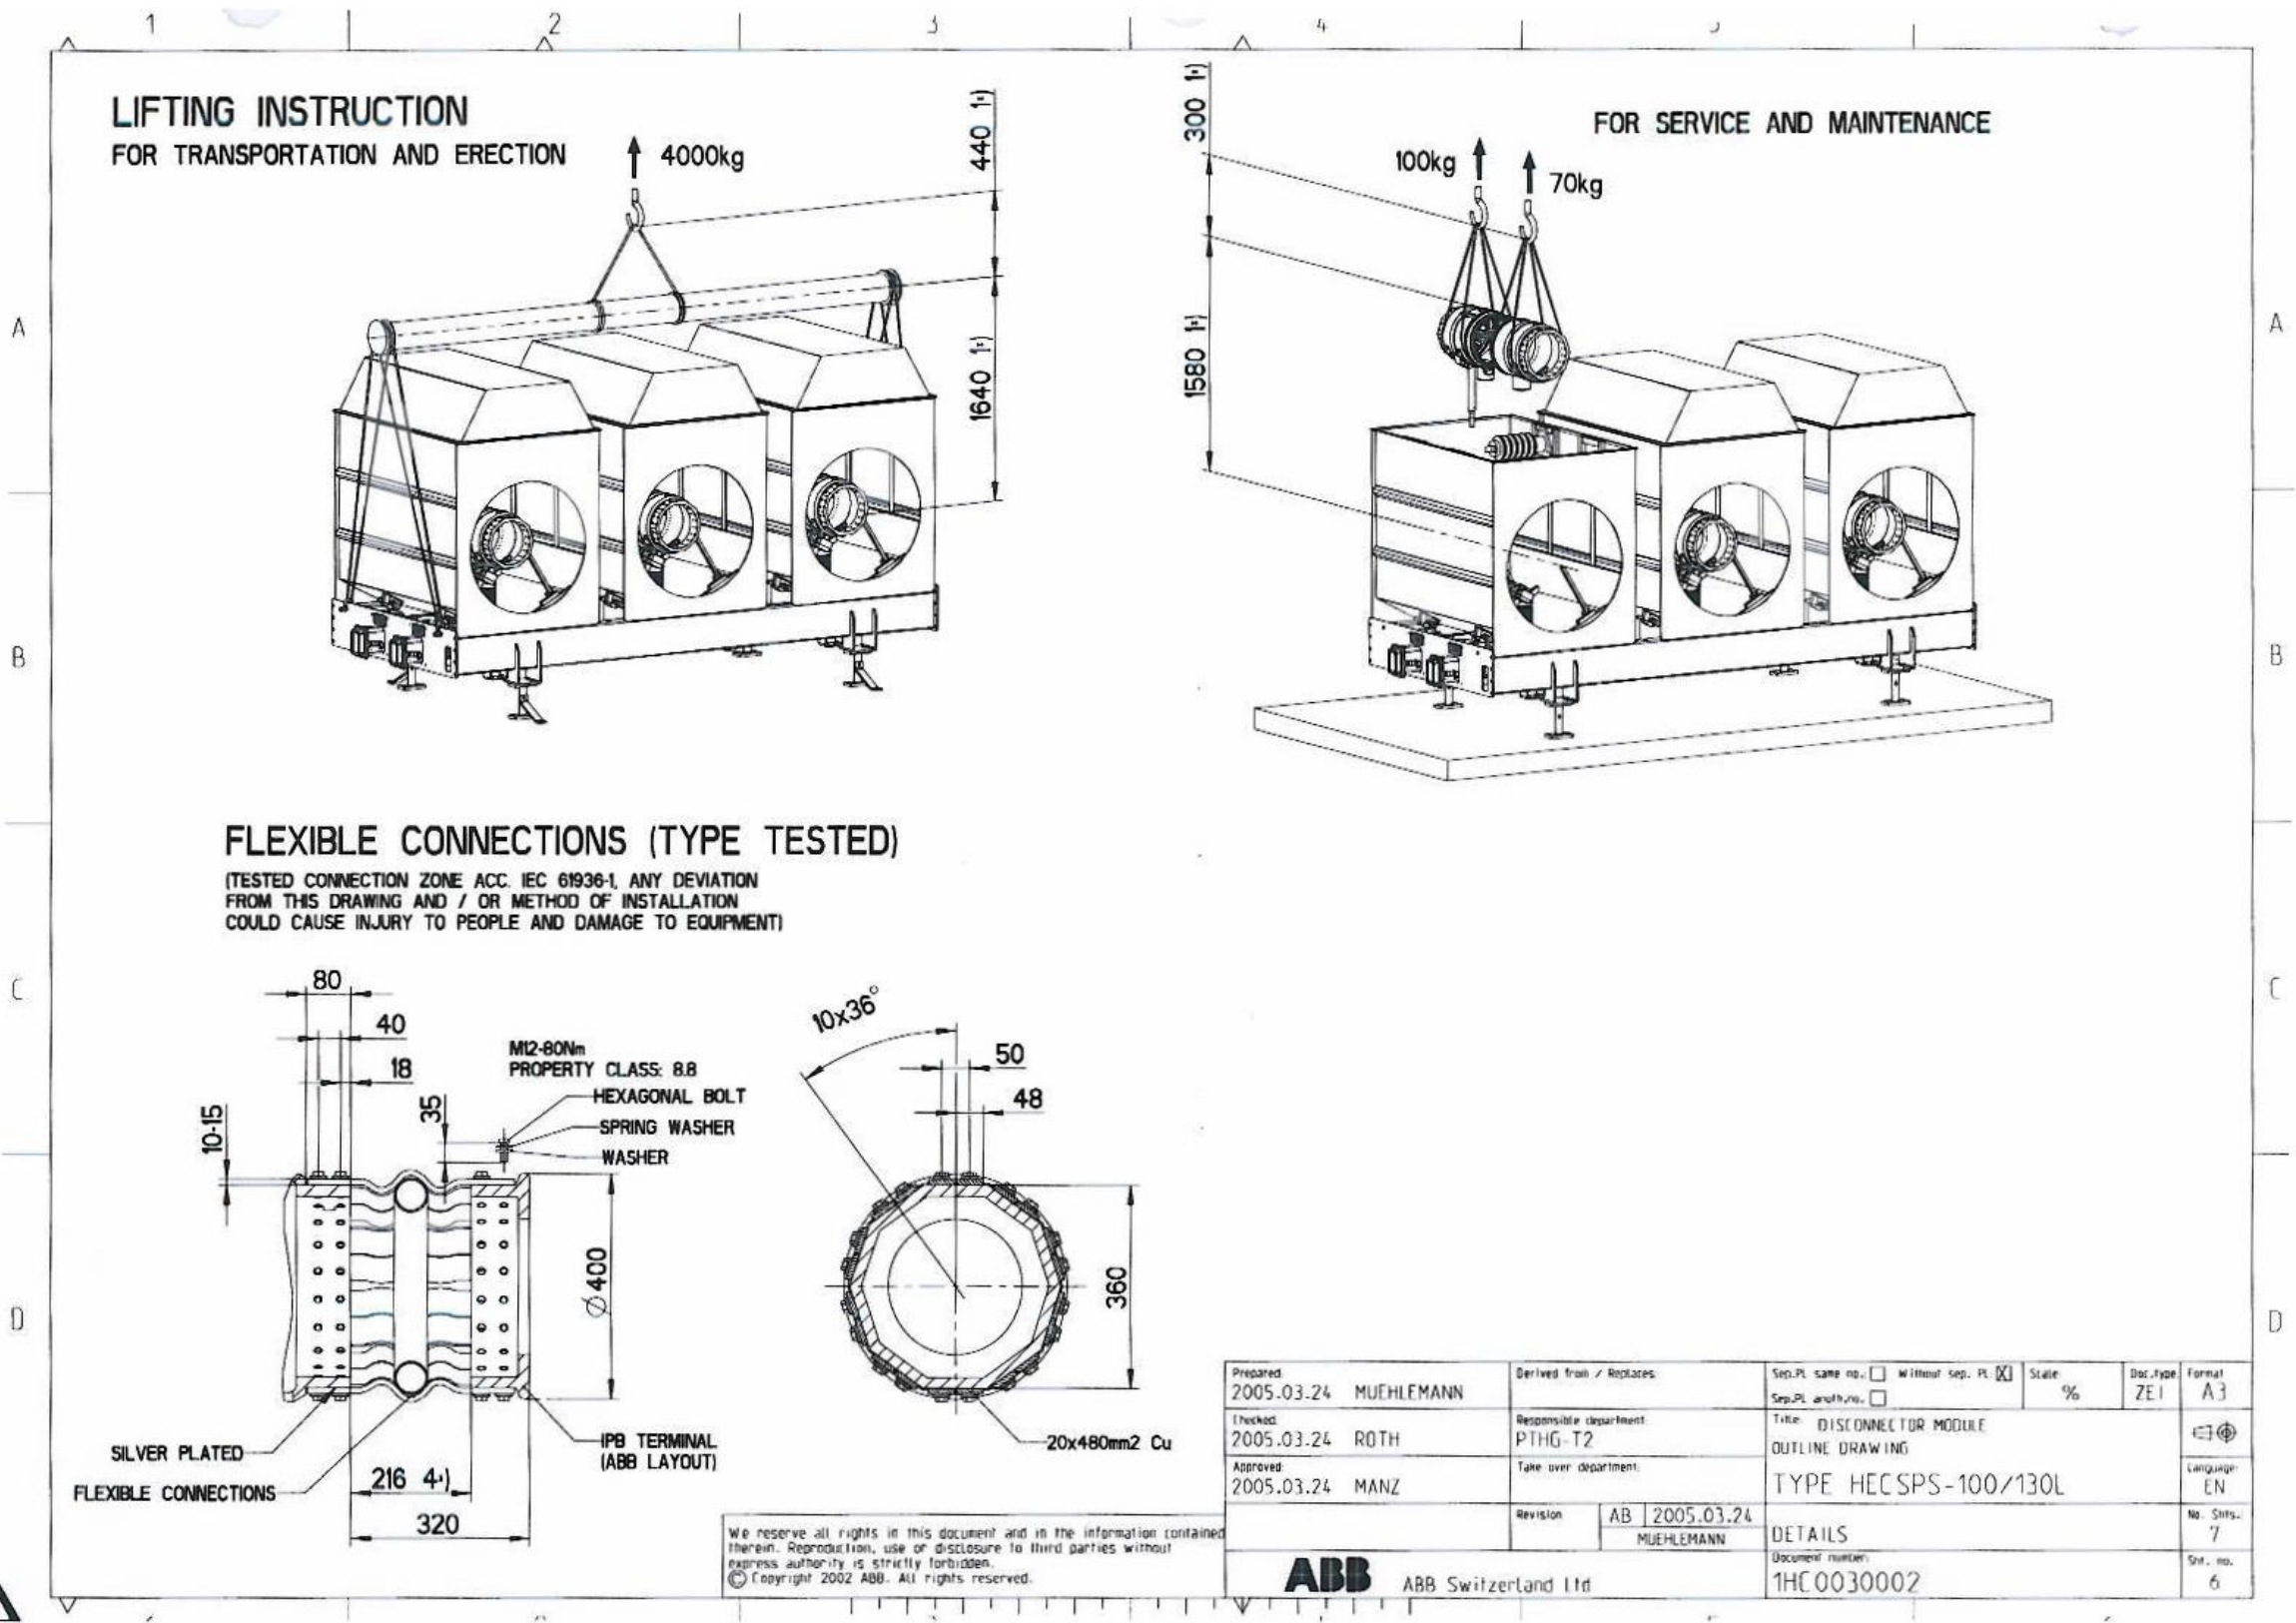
Toshiba Typical Supply ABB Type HECPS-100/130L, Drawing 1HC0030002, Sheet 6 of 7
